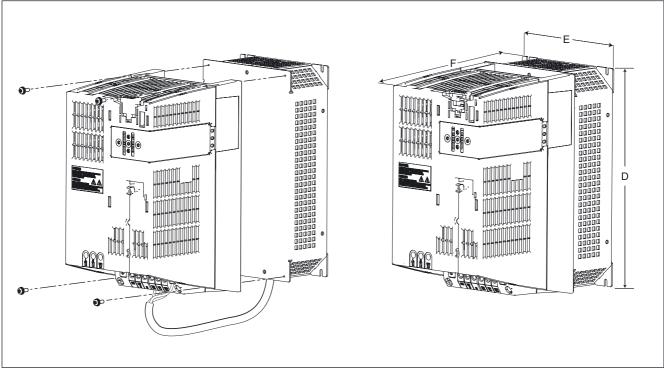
Mounting dimensions of motor reactors, frame sizes FSD, FSE, FSF
